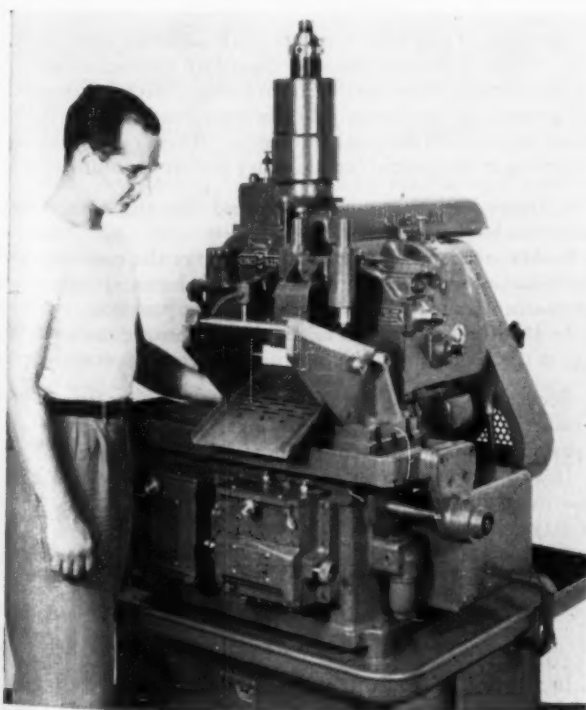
AUTOMATIC MILLER FOR CUTTING WOODRUFF KEYWAY IN SHAFTS
